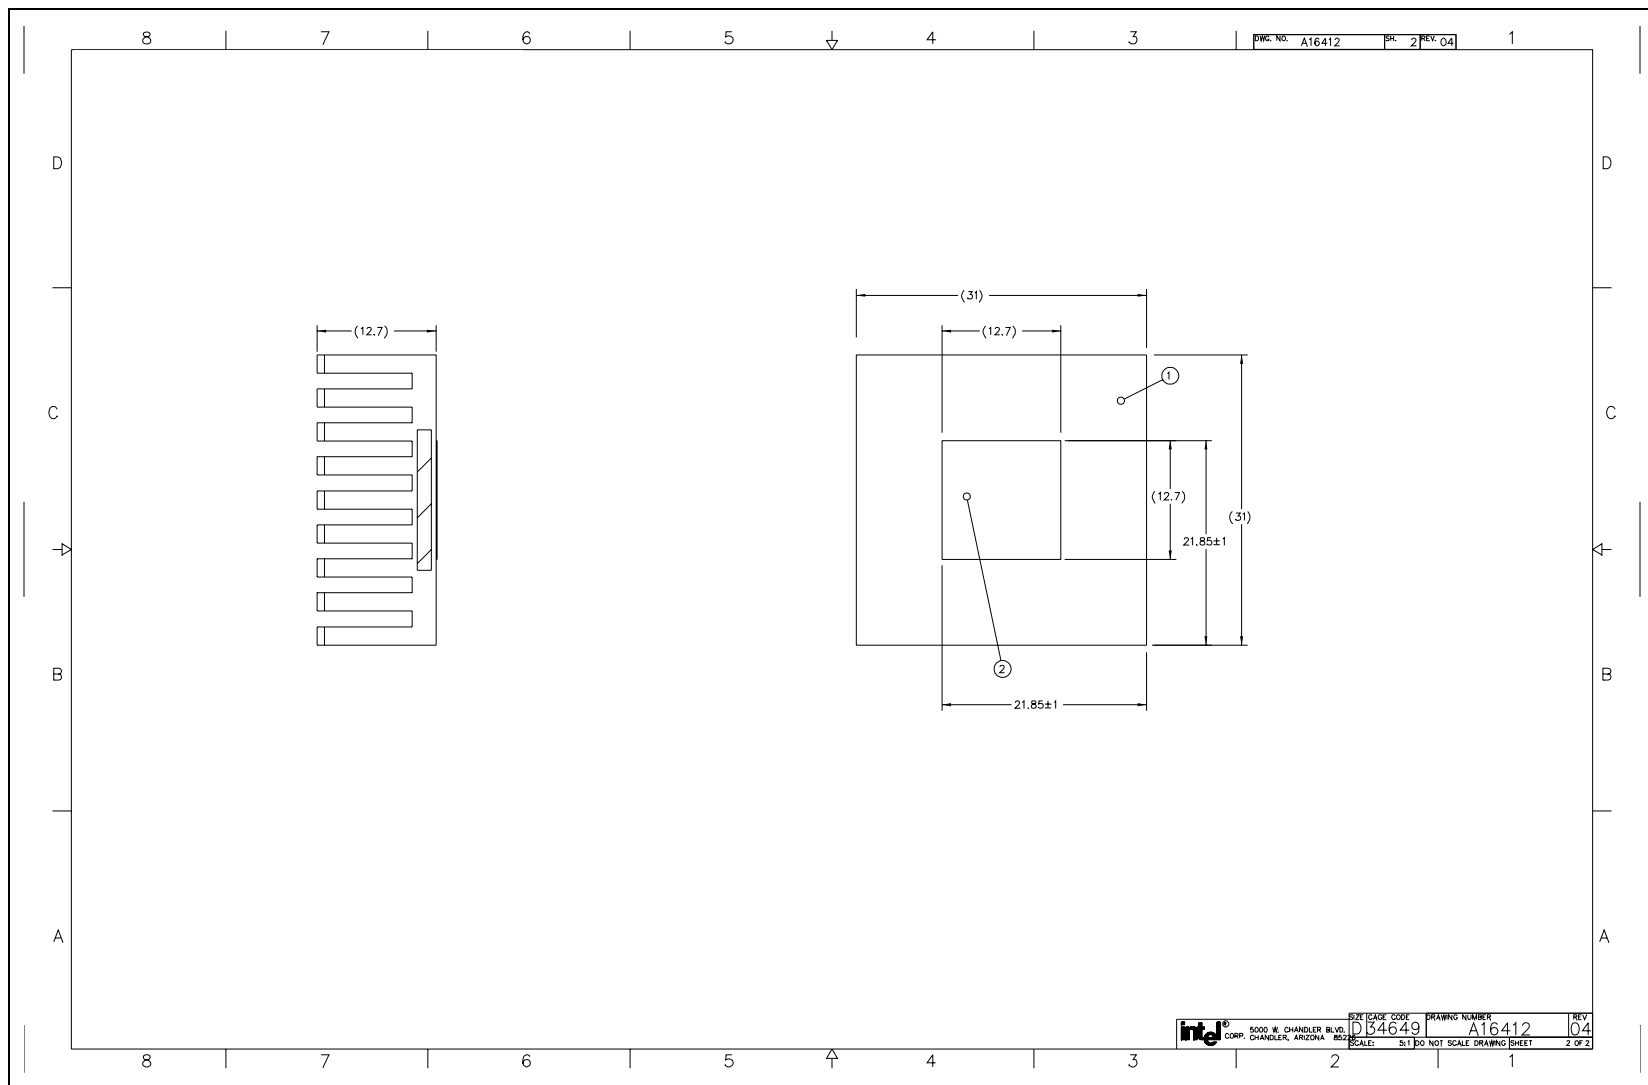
Clip Heatsink + TIM Assembly Drawing (Sheet 2 of 2)
